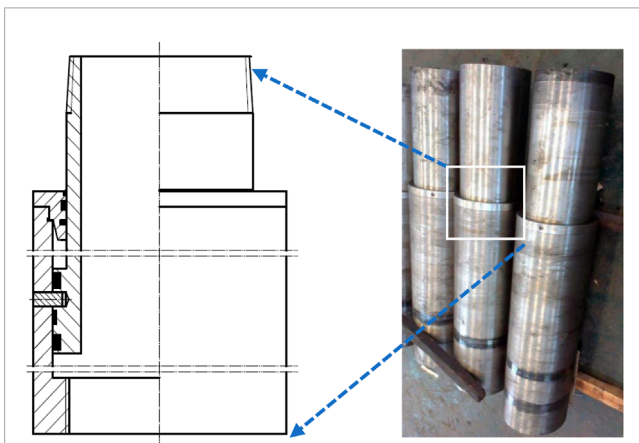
Assembly diagram and photograph of the expansion protection equipment.
